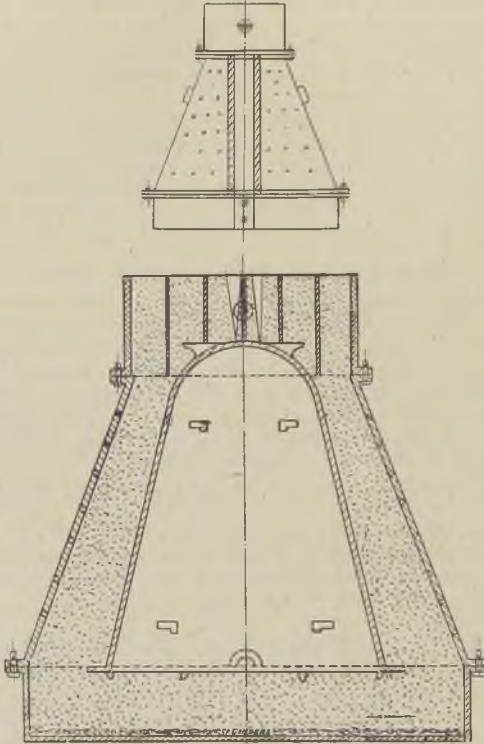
SHOWING THE MOULDING OF A CASTING IN A BOX.
